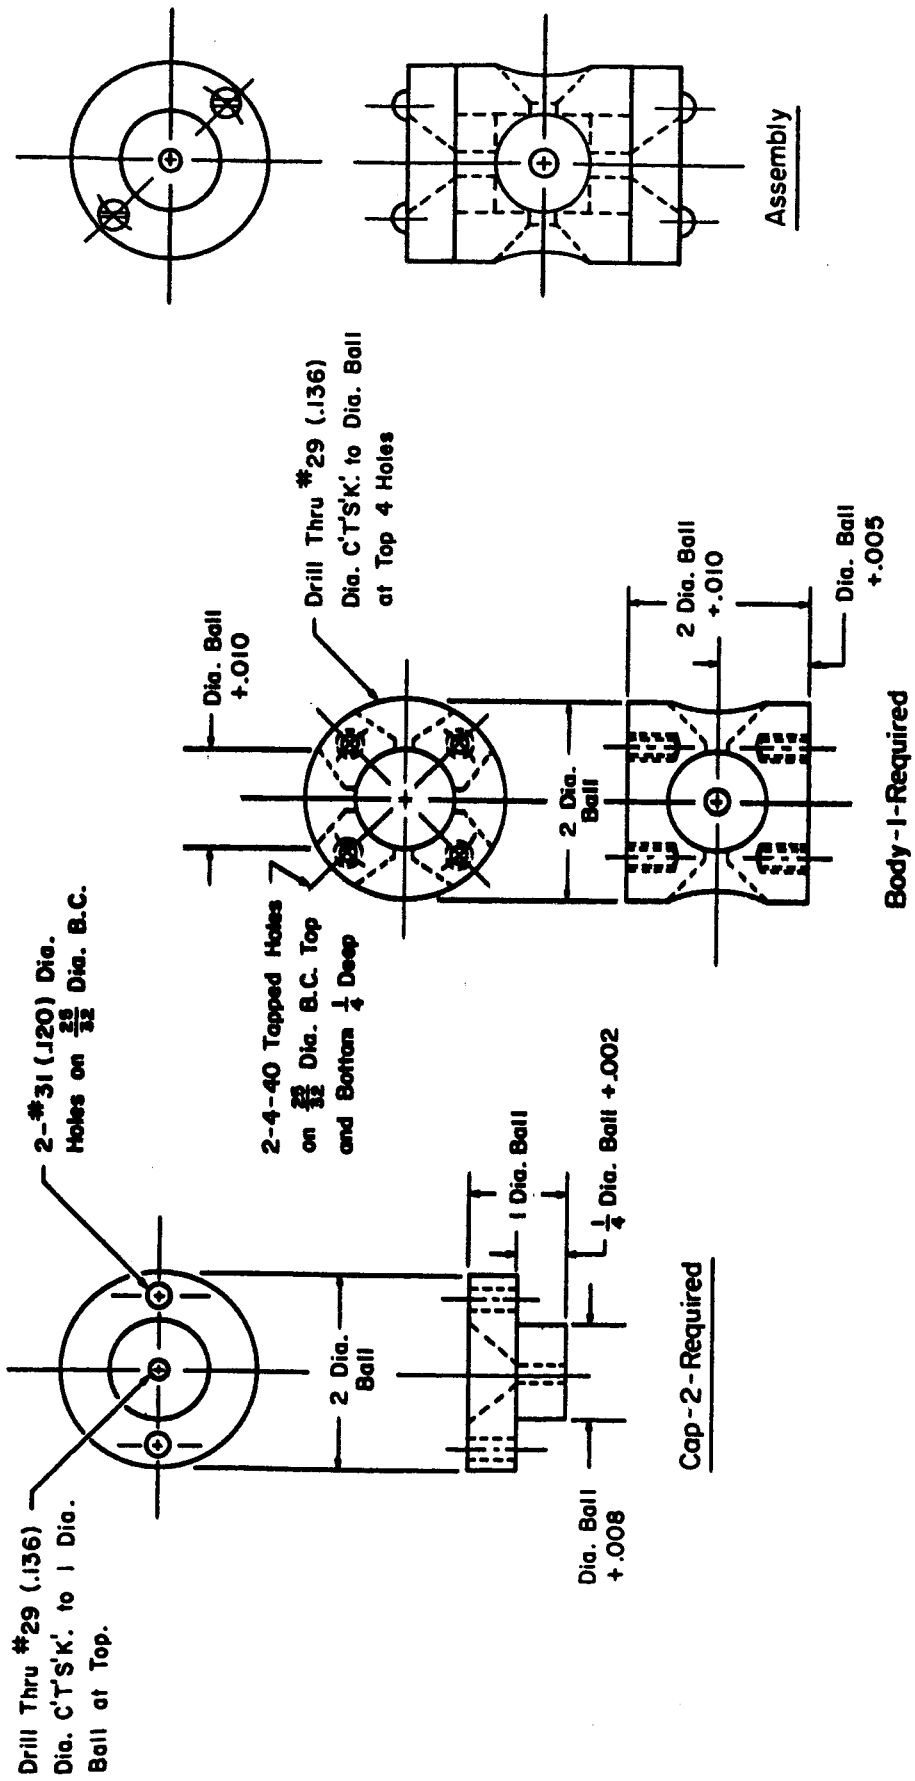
Ball exposure cage. Drawing No. RA-2264
